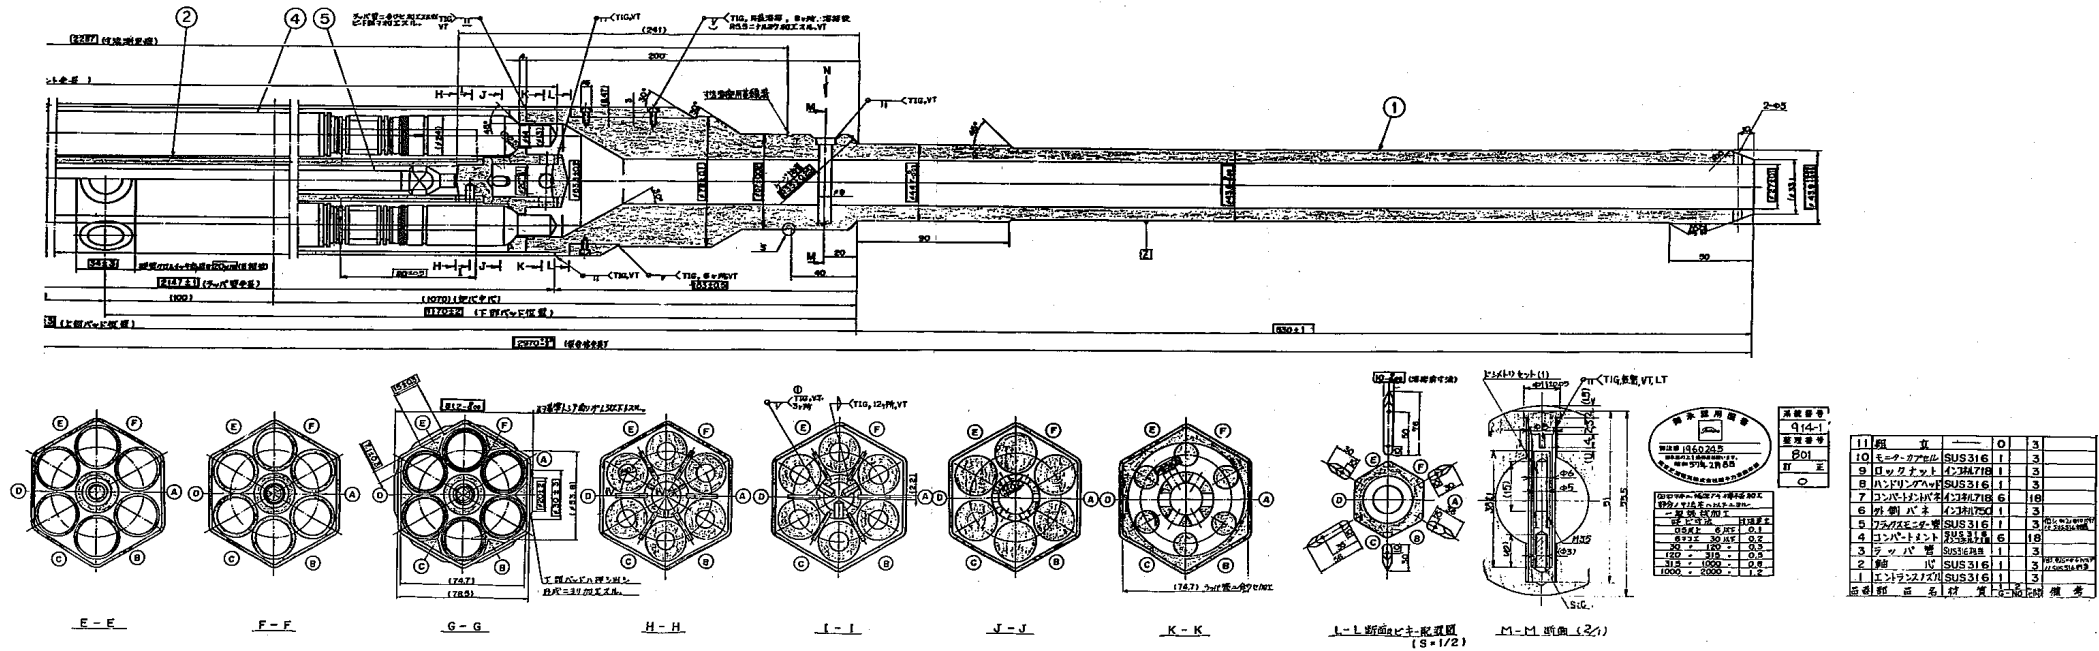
CMIR Irradiation Test Assembly (2)
